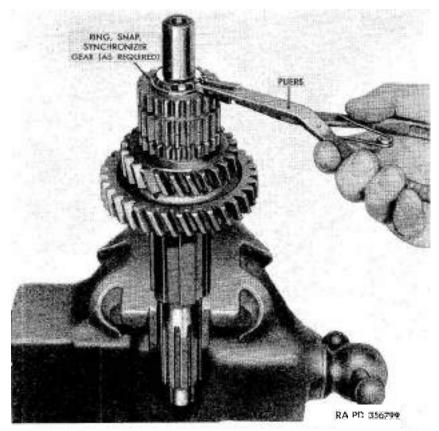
Removing synchronizer gear snap ring with snap ring removing pliers.
